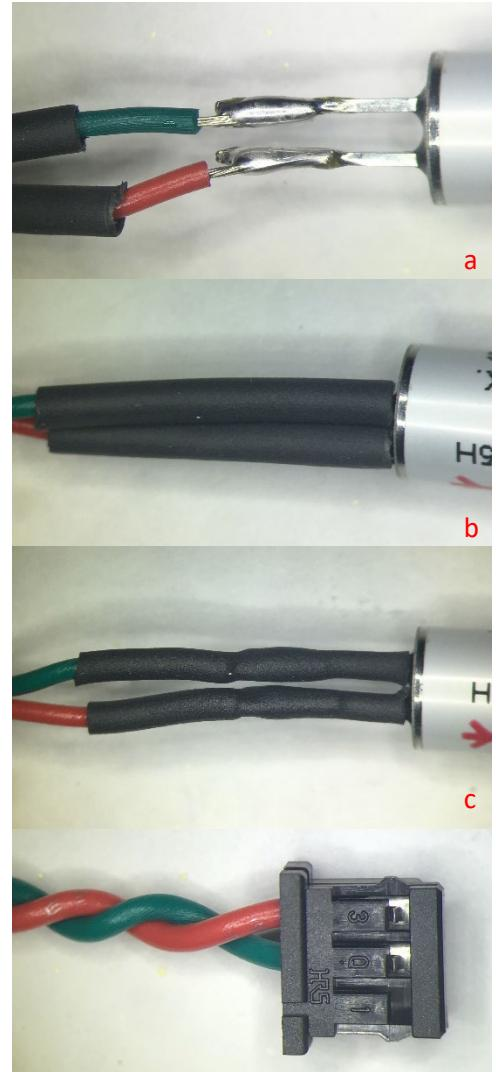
Adding leads to solenoid valve. a) solder b) slide on heatshrink c) shrink heatshrink d) insert receptacle - note which receptacle slot is empty
